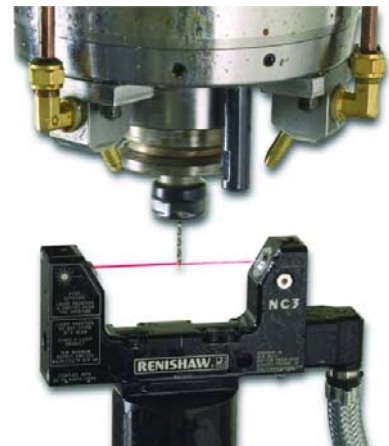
Laser beam partially blocked by passage of tool between transmitter and receiver
